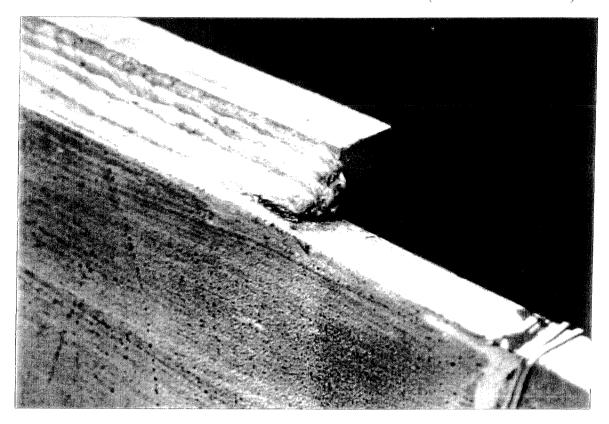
TEARING IN TOP COVER PLATE WELD (AFTER 6" CYCLES)
